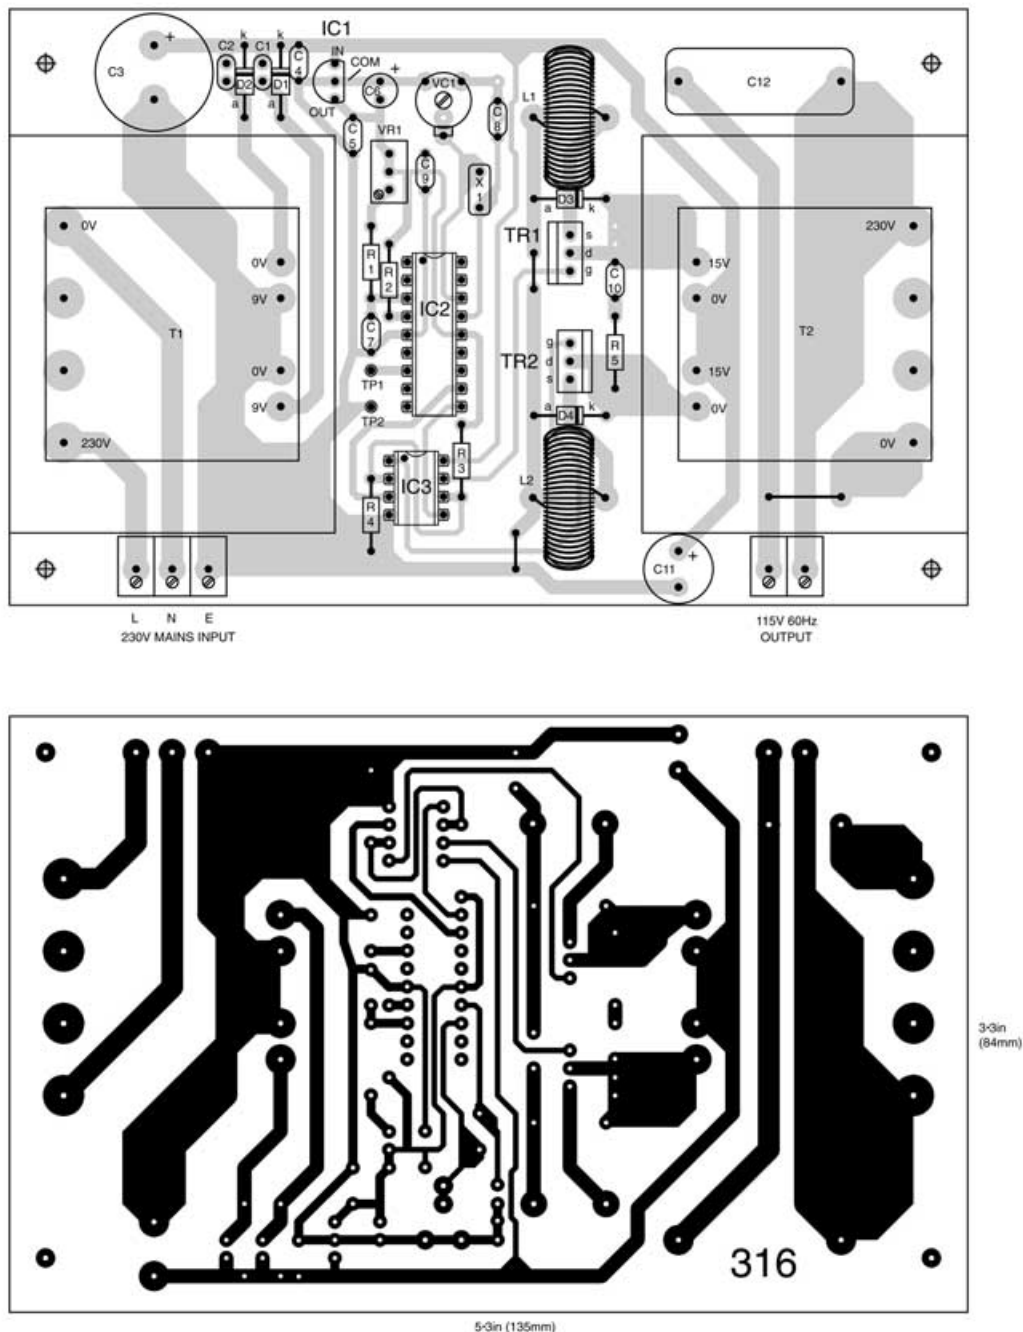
Printed circuit board component layout and full size copper foil master track pattern for the Synchronous Clock Driver.
